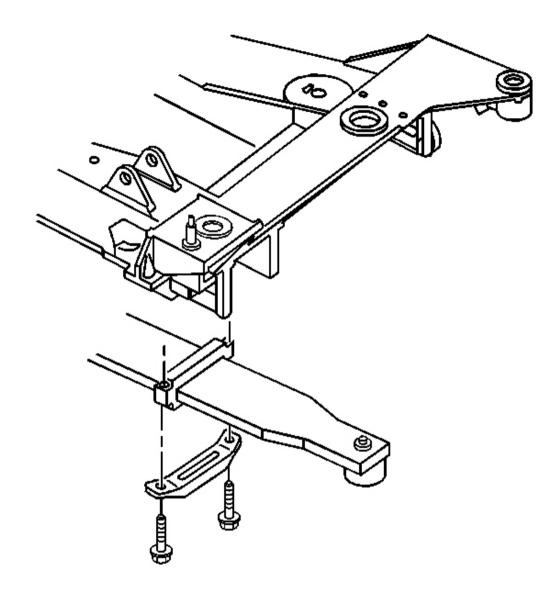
Transverse Spring, Transverse Spring Compressor & Bolts Courtesy of GENERAL MOTORS CORP.
